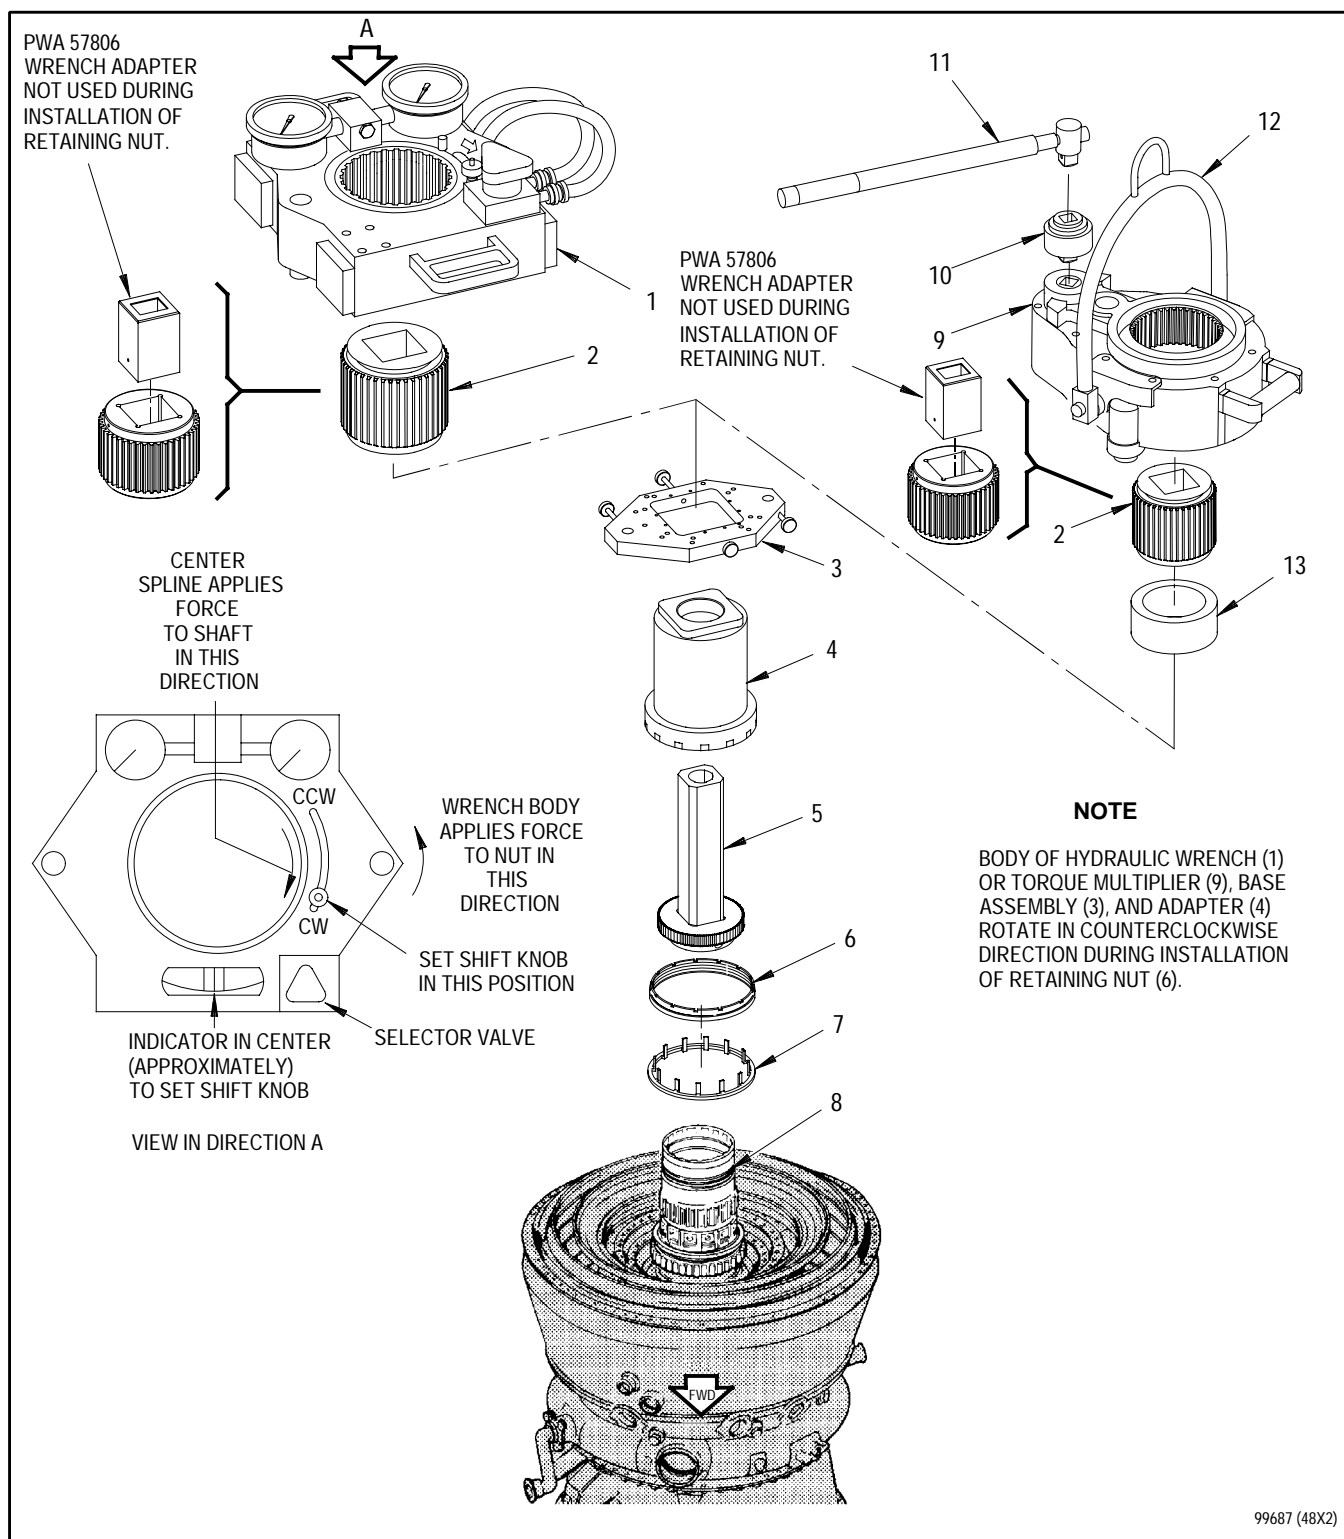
No. 4 Bearing Retaining Nut - Installation Tooling
